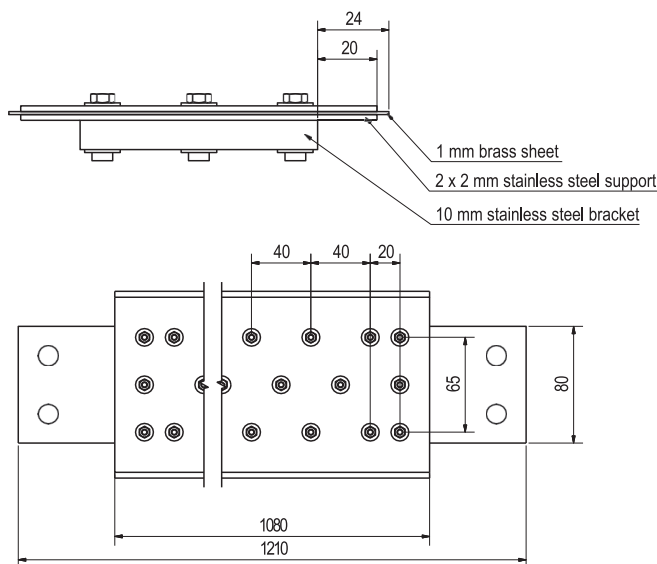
Drawing of the scraper blade and the support of the scraper.
